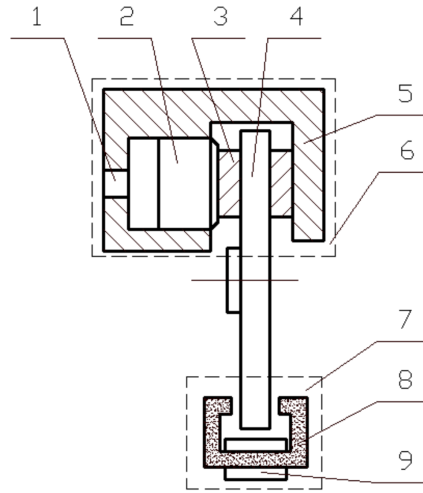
Schematic diagram of electromechanical structure of composite brake: 1-oil hole, 2-brake piston, 3-friction block, 4-brake disc, 5-brake caliper body, 6-friction brake, 7-electromagnetic brake, 8-iron core, 9-coil
